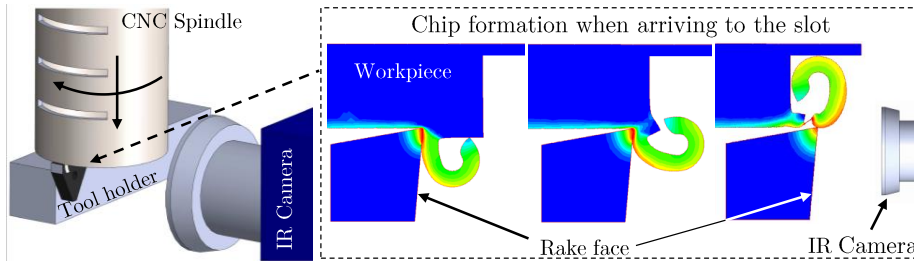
Installation of the IR thermometer with respect to the tool rake face; When the tool reached the slots the chip was removed and the rake face became visible.
